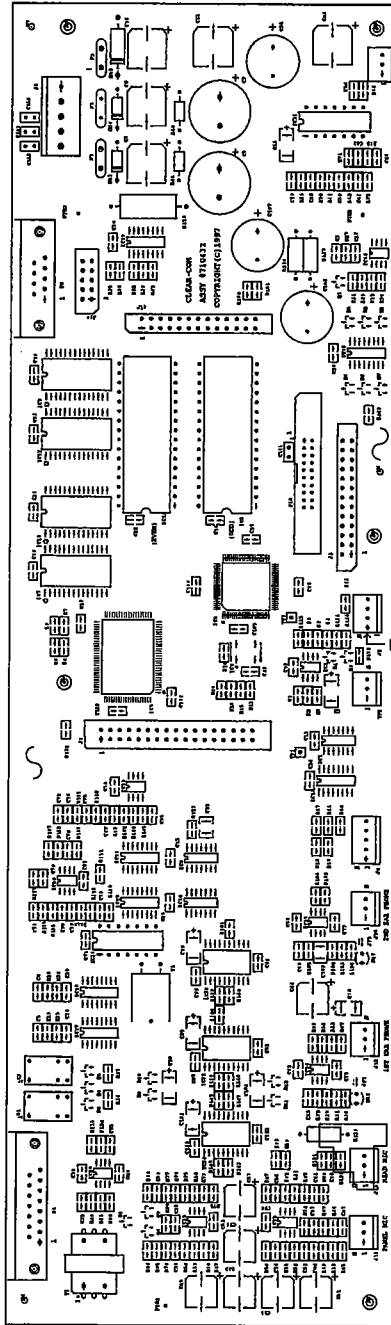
ICS-2003 Main PCB Sheet 2 of 2 Rev. C
